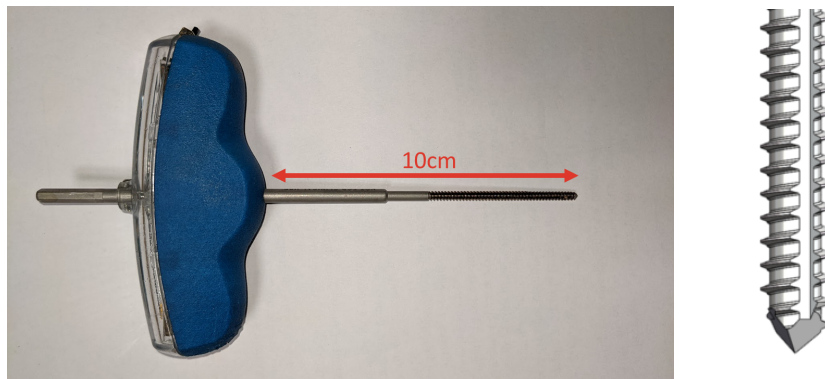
"Threaded" robotic drill bit prototype.
